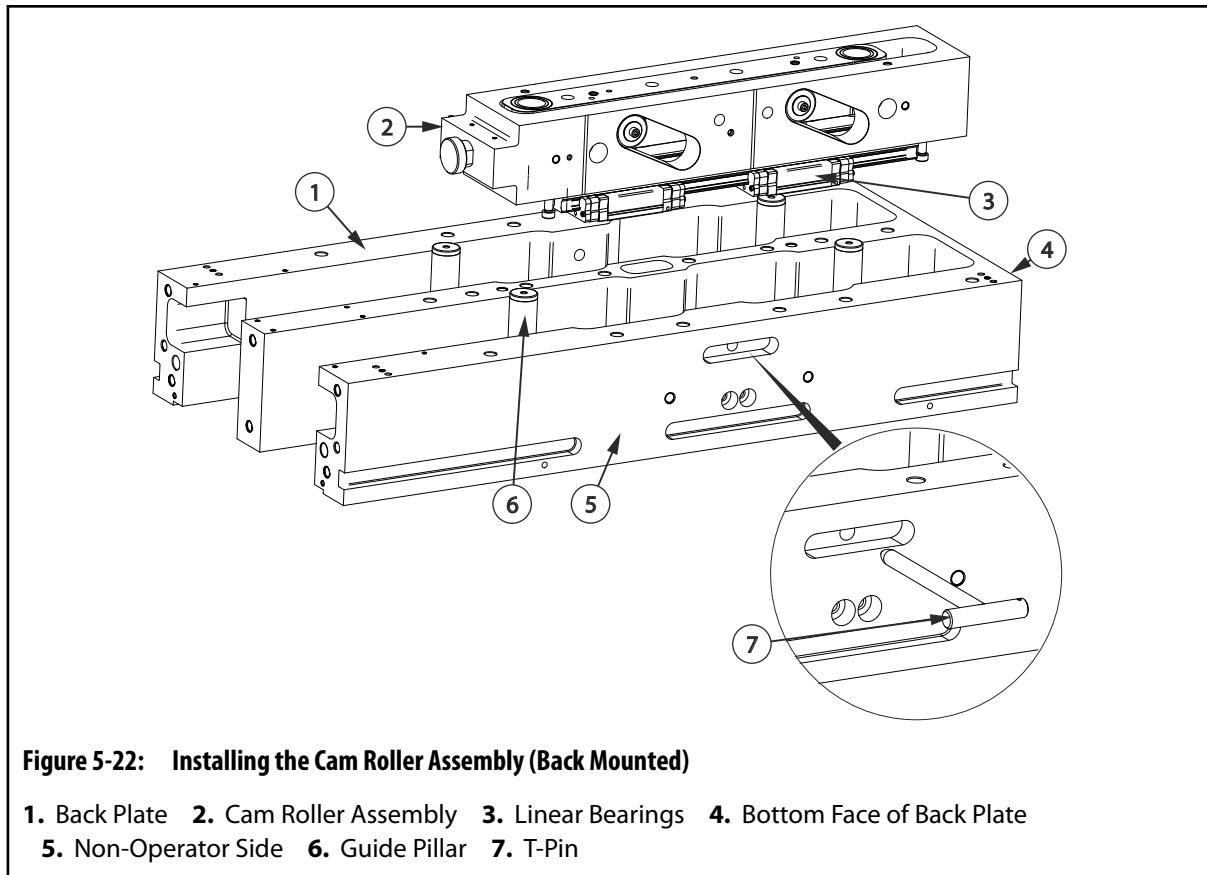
Installing the Cam Roller Assembly (Back Mounted)
